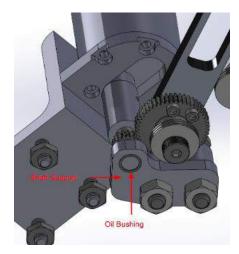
This figure shown a screengrab highlighting the shaft support plate, labeled shaft support. This is a view from the bottom of the assembly with the base plate hidden to reduce confusion.
